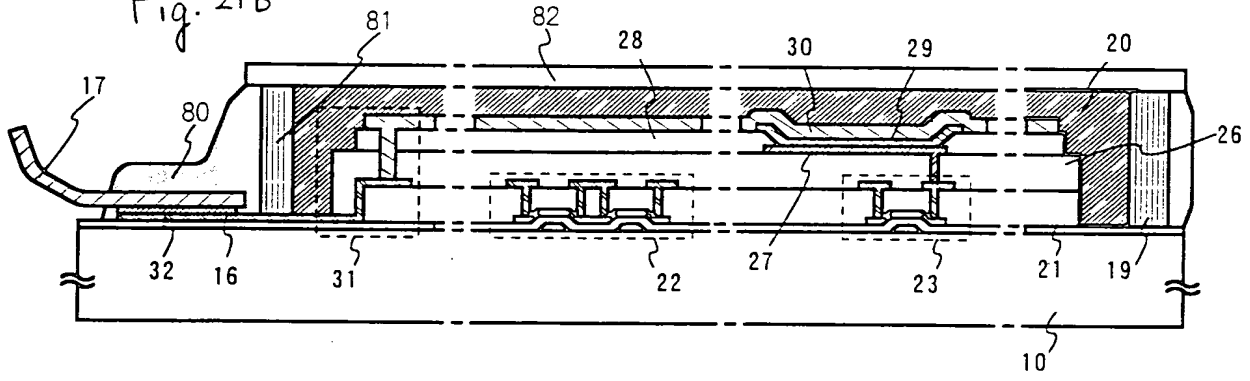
A is a cross-sectional view of a device assembly 10, and FIG. 21B is a longitudinal cross-sectional view of the device assembly 10.
